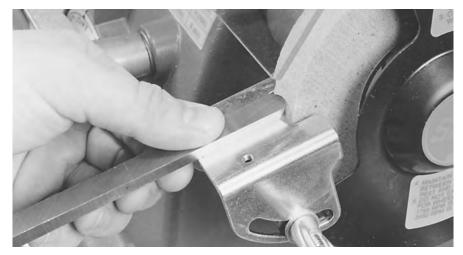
Slide the chisel, bevel down, until its center touches the grinding wheel.
